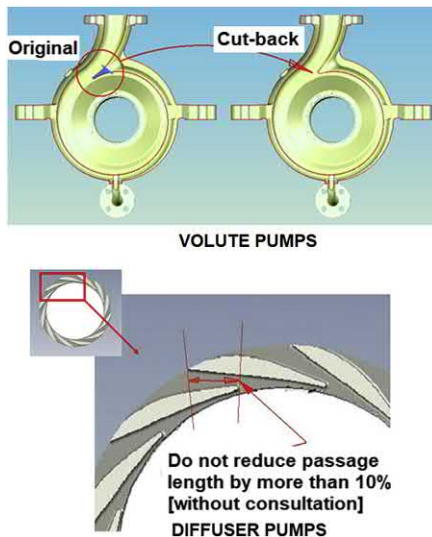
Area increase of collector throats can be achieved by cutting back the collector tips. There are restrictions to this — particularly with diffuser machines.
